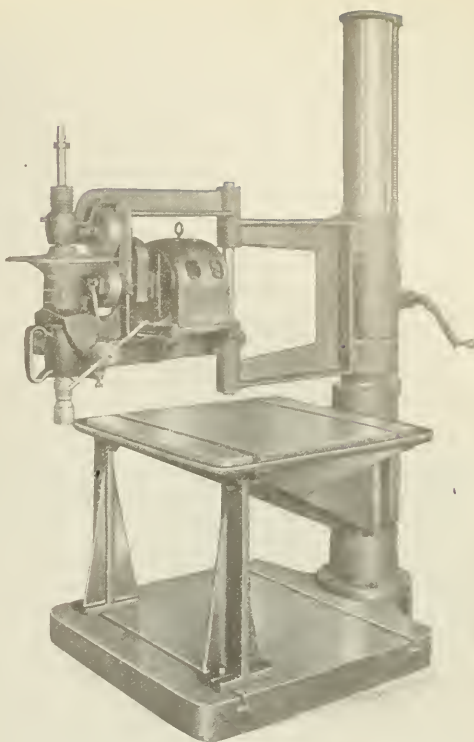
Rickert-Shafer Radial Tapping Machine with Double Arm extended
